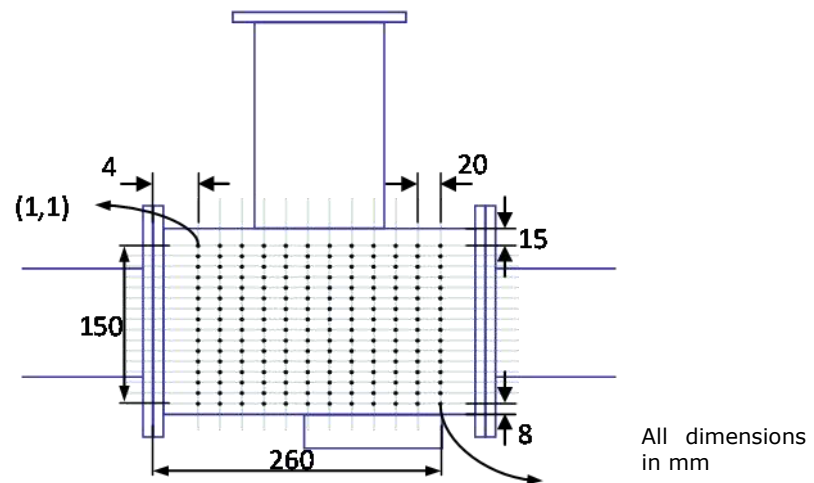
Applicator centre section with grid of holes for probe measurement
